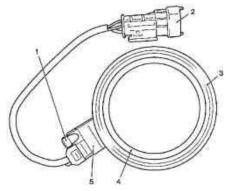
Scheme of connecting the sensor to the rear crankshaft oil seals: 1 - attachment bolt crankshaft sensor, 2 - plug the wiring harness of the crankshaft sensor, 3 - Rear crankshaft oil seal, 4 - sealing edge of the crankshaft flange, 5 - a nest of the crankshaft sensor
